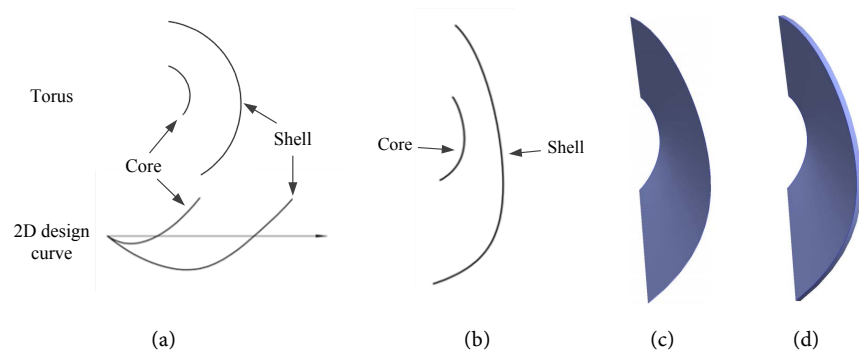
Schematic representation of the construction of impeller blade: (a) 2D design curve for impeller blade, (b) 3D curve of impeller, (c) blade profile of impeller, (d) blade geometry of impeller.
